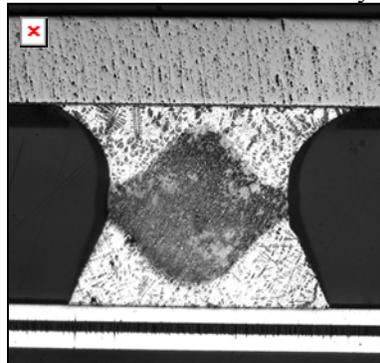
SEM image of a triple stacked hourglass shaped solder bump.
